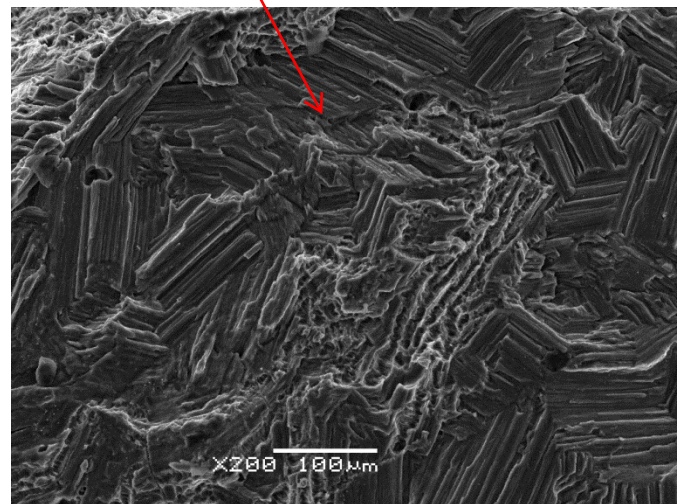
Fracture surfaces of round specimens under different types of loading [40]
